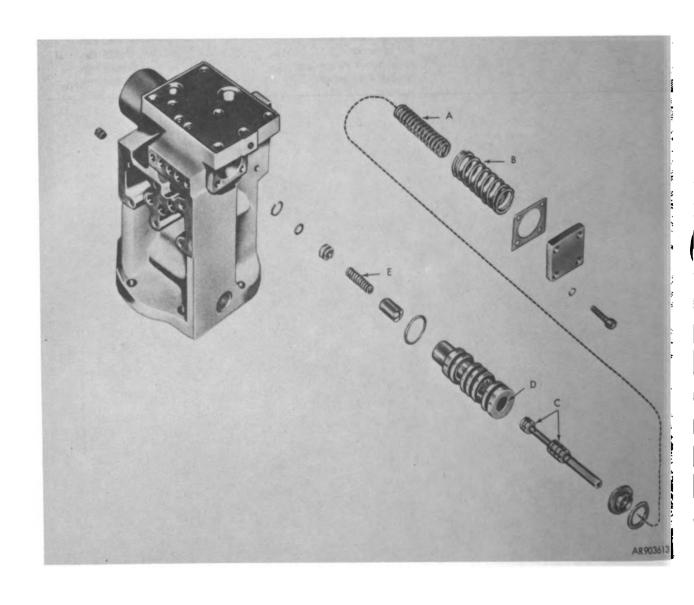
Power pack hydraulic riser pressure regulating valve wear points.
